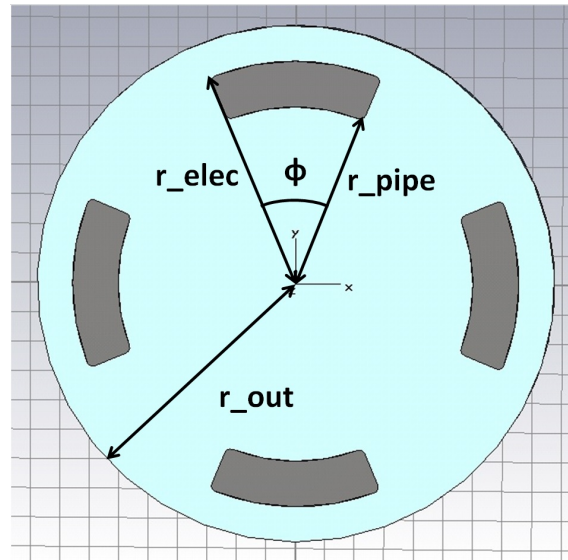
Cross-section dimensioning of a stripline PU prototype.
